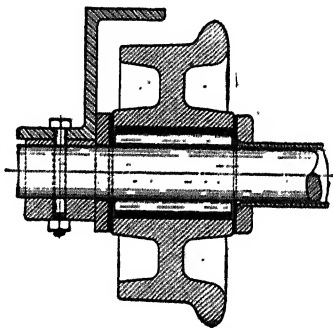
Arrangement of bearing with solid steel rollers and steel bushing.
